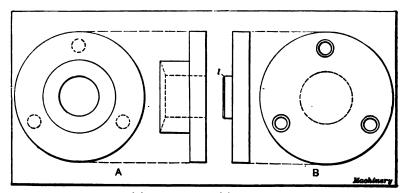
(A) Packing Gland. (B) Drill Jig for Gland
